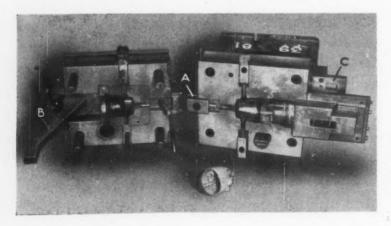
A View of the Die Employed for the Motor Housing of the Tarpen Hedge Trimmer. Showing the Finger Cam B which Operates the Main Core
